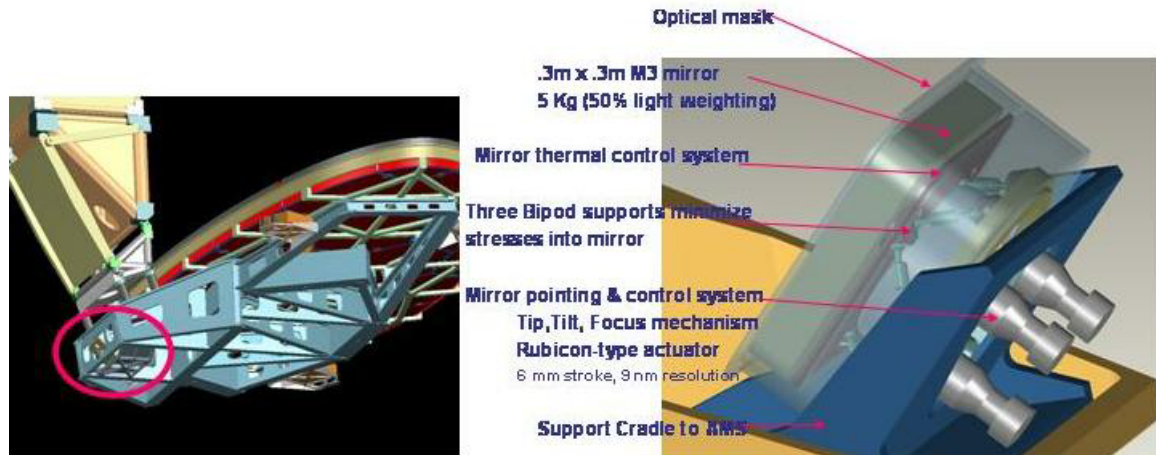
CAD Views of Secondary Mirror Assembly.
